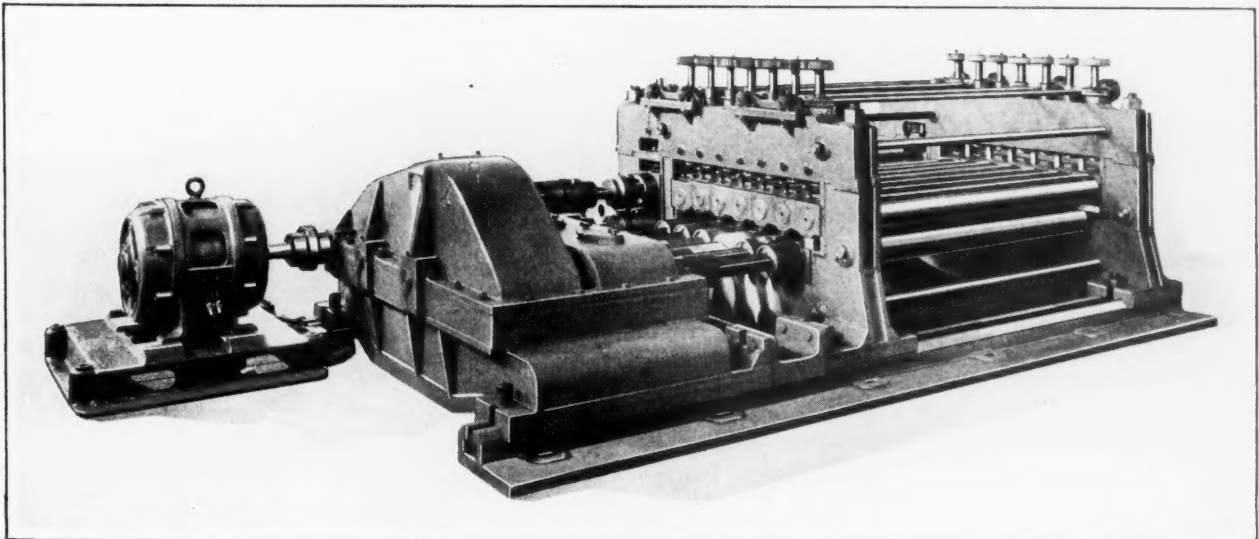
Roller Leveler with Housings and Gear-case of Steel-plate Arc-welded Construction
